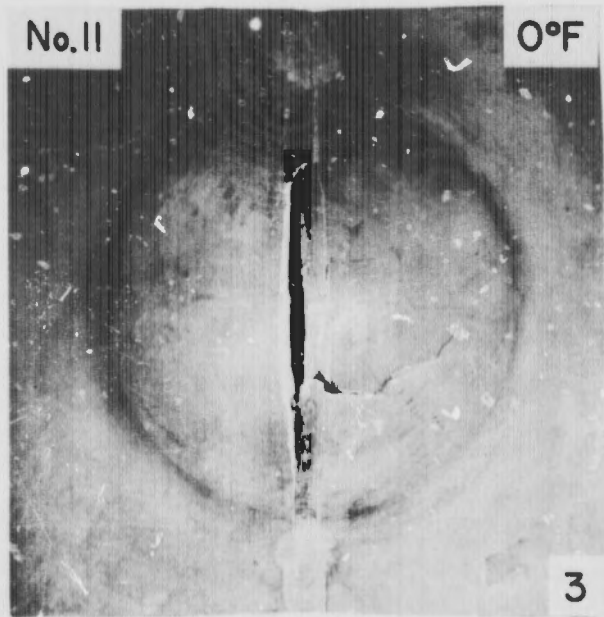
Explosion bulge test fracture characteristics of high welding energy input inert-gas-shielded metal-arc weldments. (Code Z, HY-80 heat No. 20120-12.)
